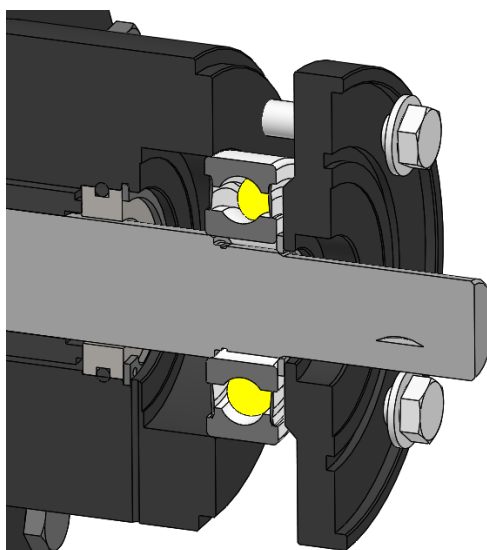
the bearing is installed front flush to the inboard (driven) bearing housing (orange line)
